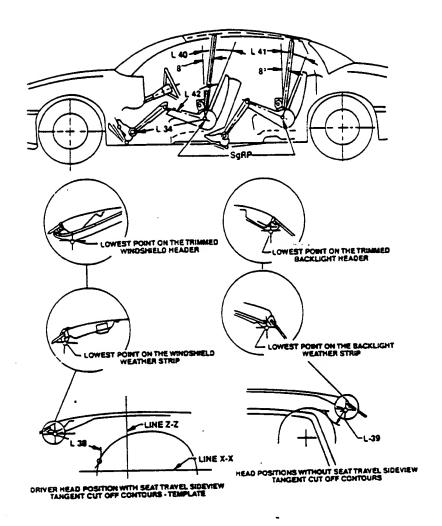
INTERIOR DIMENSIONS, LENGTH
